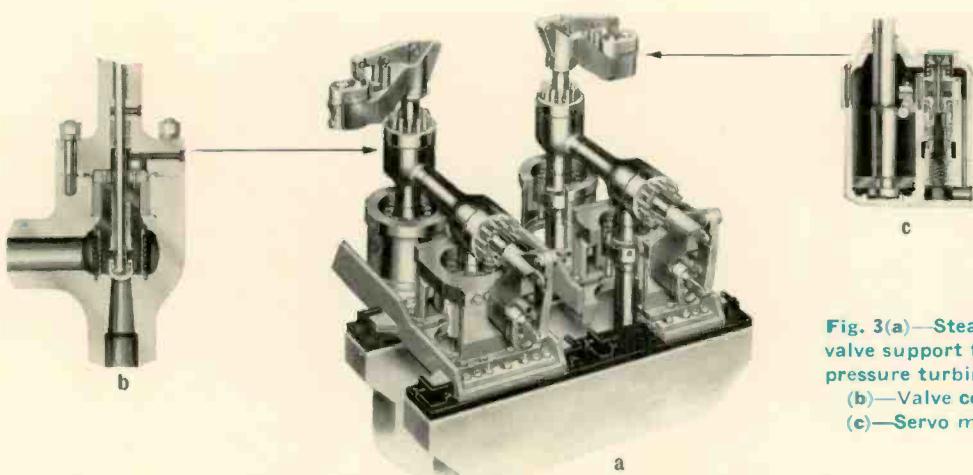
(a)—Steam inlet features and valve support for the super-pressure turbine element.
